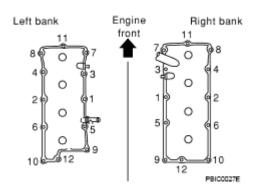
Identifying Rocker Cover (Right Bank) Mounting Bolts Loosening Sequence
